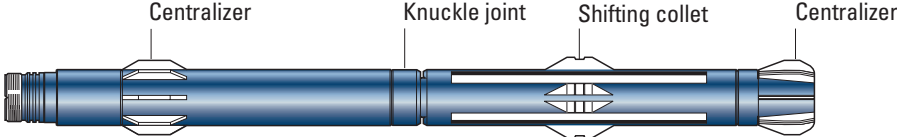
FIV shifting tool is used to open and close the ball valve mechanically.
